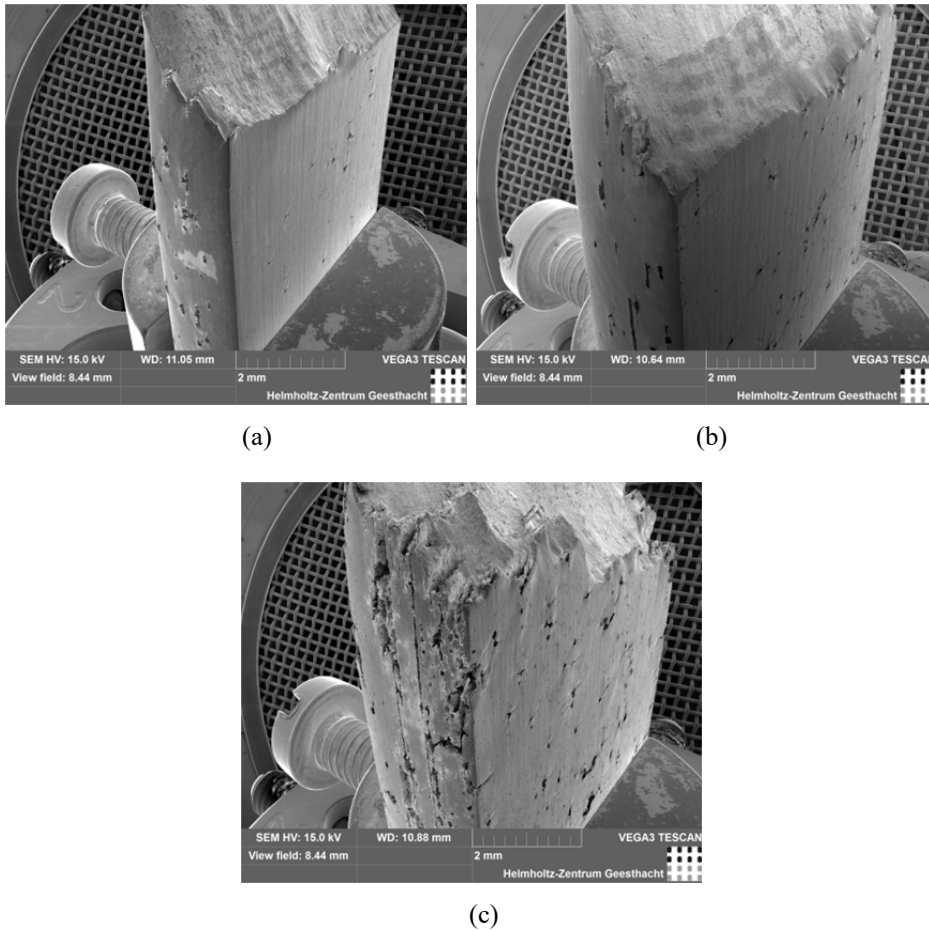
Fracture surfaces of AA2198 pre-corroded tensile specimens (a) 2 h; (b) 6 h; (c) 24 h.
